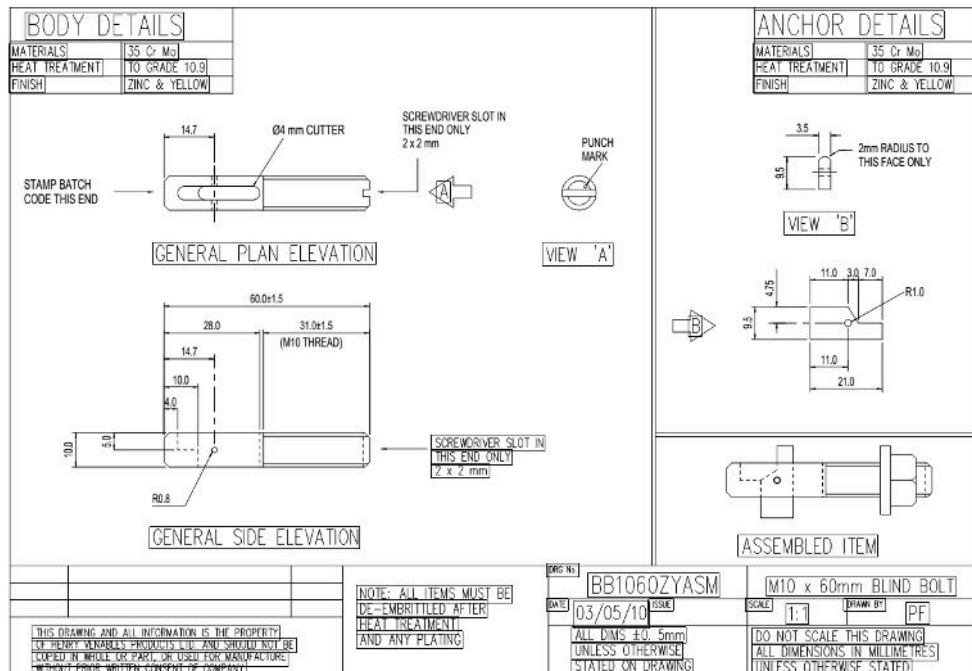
Dimensions and geometric tolerance for blind bolts M10
